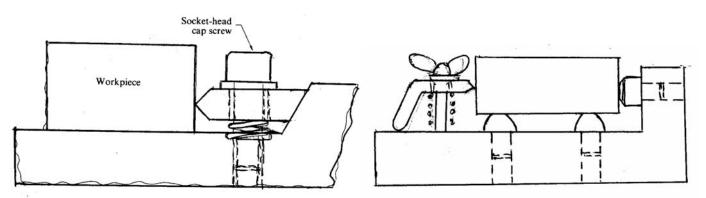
Clamping from side for free machining of the top surface.
